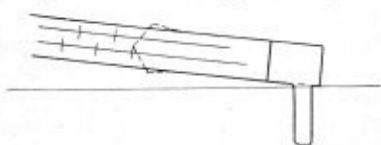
Method of forge welding cast-steel firebox ring ends to wrought-iron side pieces.
